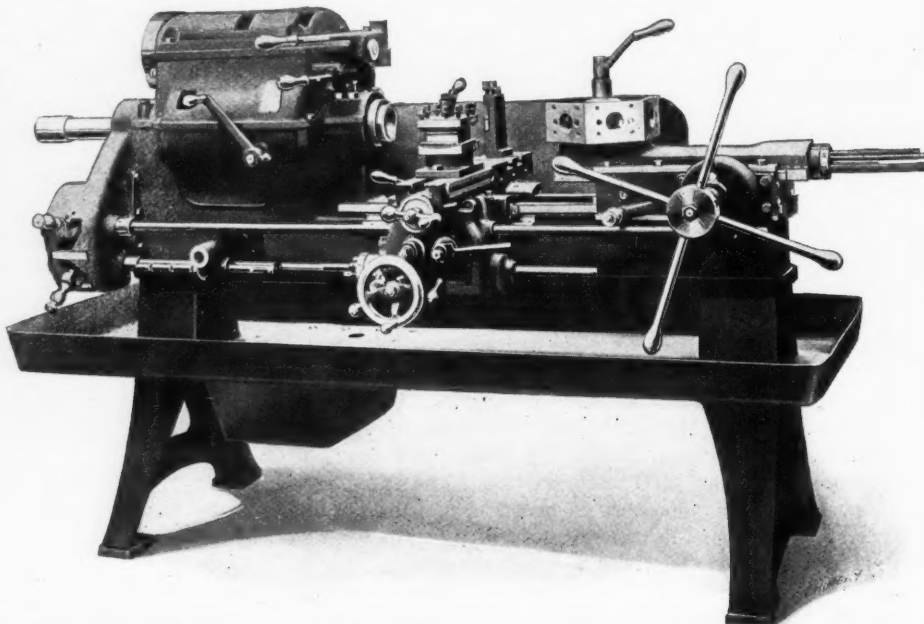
Warner & Swasey No. 4 Universal Turret Screw Machine with Single Pulley and Geared Head
